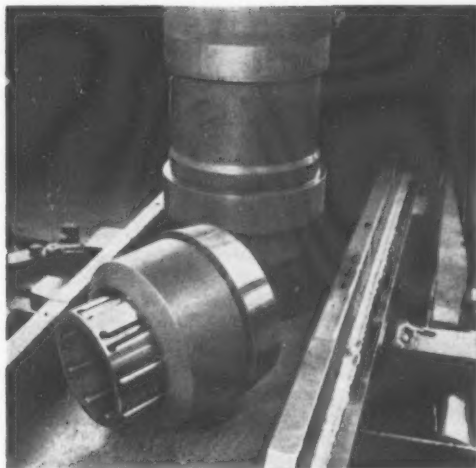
This Tool for Burnishing External Surfaces has Nine Hardened Steel Rollers Equally Spaced Around a Holder by a Retaining Cage
